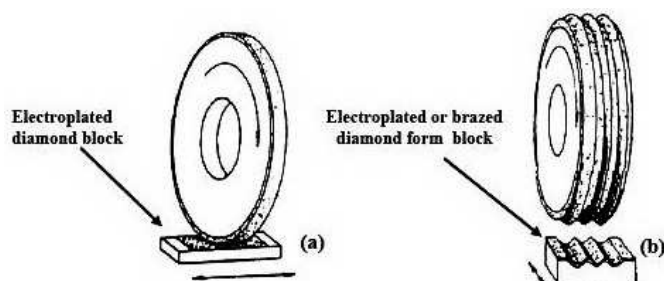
Diamond form truing block to true (a) a straight faced wheel (b) a form wheel
